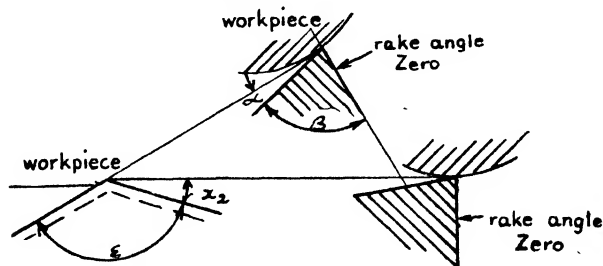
Cutting edge of a diamond tool for cutting metals
